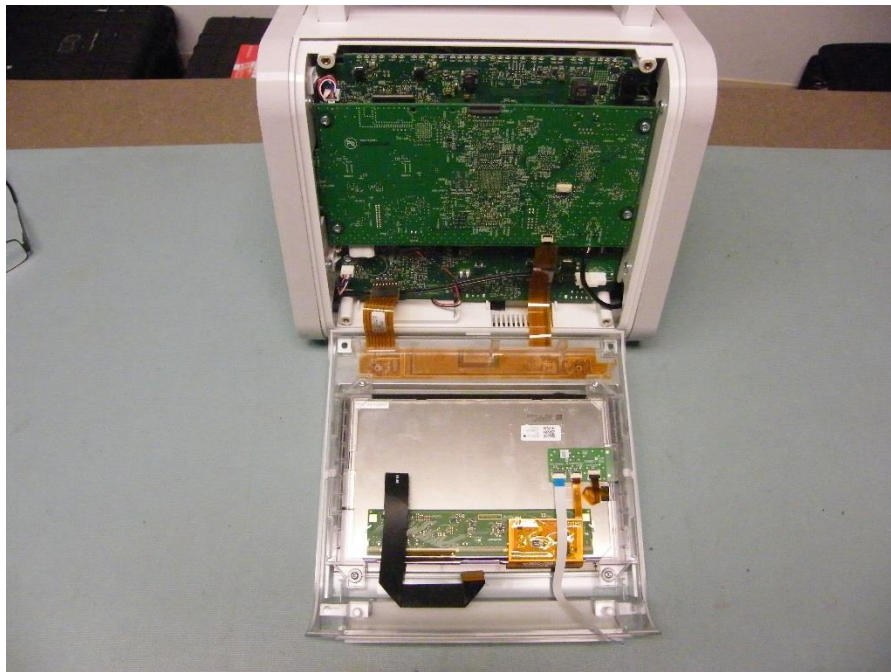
Trilogy EVO Device with front panel partially removed showing System PCA, Display PCA, Keypad and Display.
